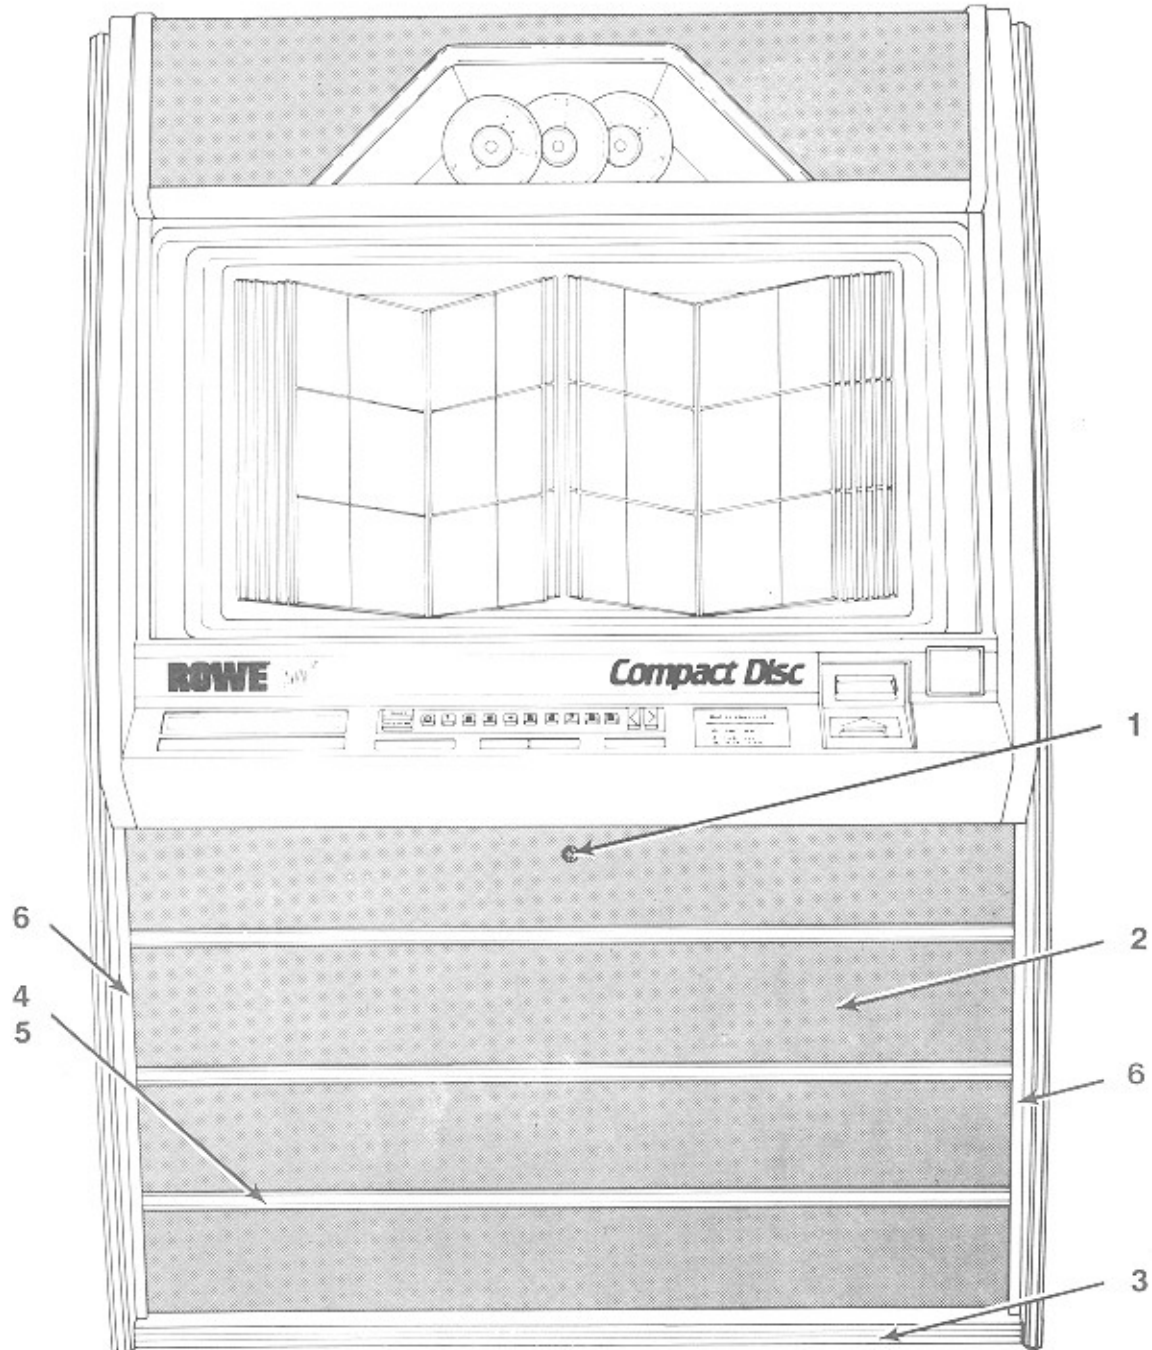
CD-100 Top Door Assembly, Sheet 2
